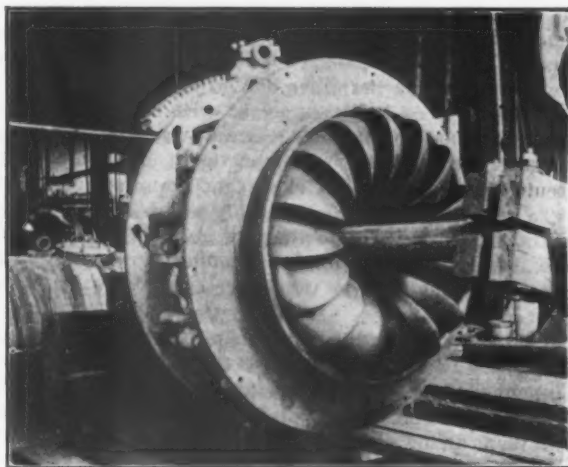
View Opposite Fig. 7, Showing Buckets.
